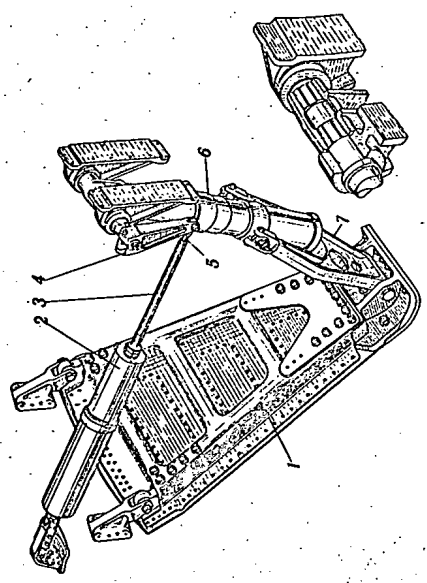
TAIL SECTION 1 - bush with steel pin; 2 - nut; 3 - eccentric rod; 4 - lower designed for operation and direction of tail; 5 - eccentric rod; 6 - shock absorber fork.
